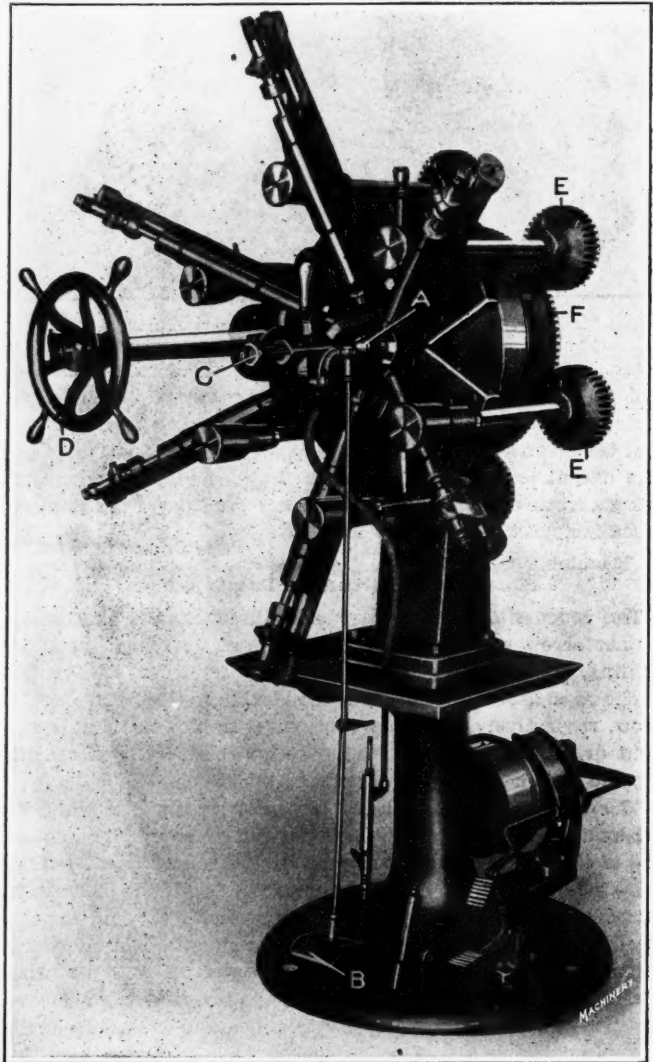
Six-spindle High-speed Drilling Machine for drilling Angular Holes in Bottom Closing Screw
